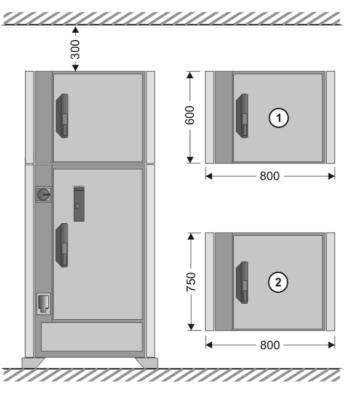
Minimum clearances with top-mounted / technology cabinet
